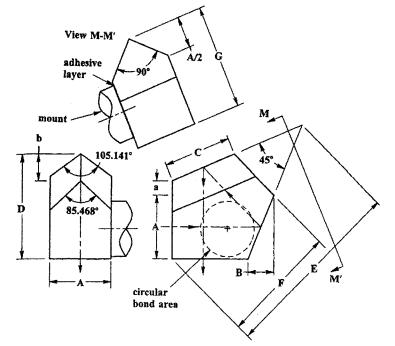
Roof penta prism. (For design and analysis, use File 6.19 of the CD-ROM.) $t_A = 4.223A = 6.334$ in. (160.896 mm); a = 0.237A = 0.355 in. (9.030 mm); b = 0.383A = 0.574 in. (14.592 mm); B = 0.414A = 0.621 in. (15.773 mm); C = 1.082A = 1.623 in. (41.224 mm); D = 1.651A = 2.476 in. (62.903 mm); E = 2.986A = 4.479 in. (113.767 mm); F = 1.874A = 2.811 in. (71.399 mm); G = 1.621A = 2.431 in. (61.760 mm); $V = 1.795A^3 = 6.058$ in.³ (99.275 cm³; $W = V\rho = 0.552$ lb (0.250 kg); $Q_{MIN} = V\rho a_G f_S/J = 0.017$ in.² (10.670 mm²); $Q_{MAX c} = 0.824A^2 = 1.854$ in.² (1196.126 mm²).
